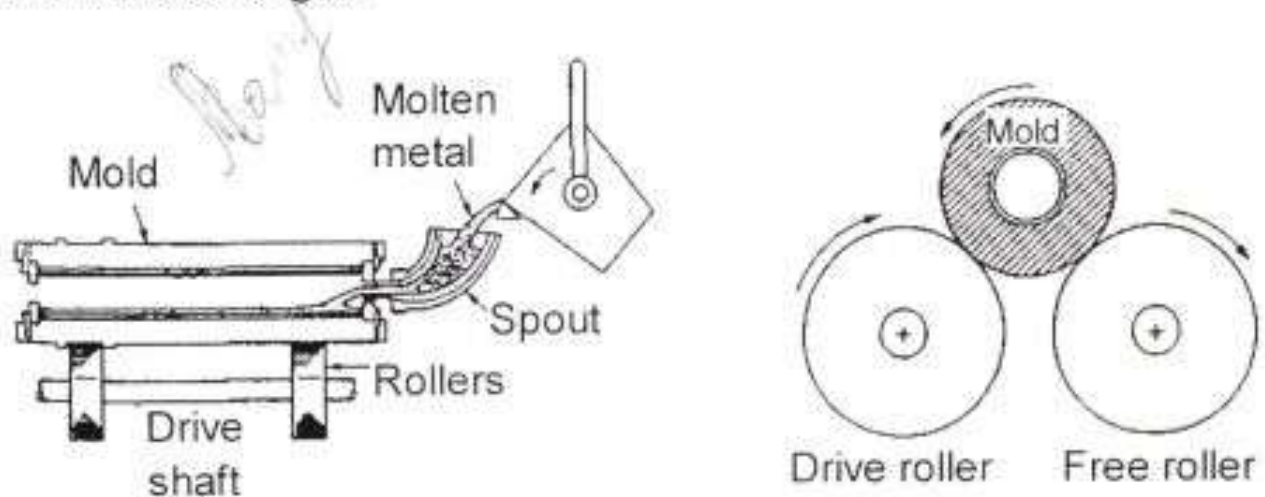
Schematic illustration of the centrifugal casting process. Pipes, cylinder liners, and similarly shaped parts can be cast by this process
